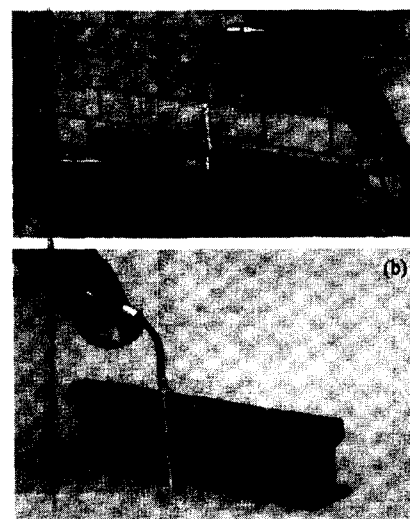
Rail track welding acc. to the Lincoln-Method - works (photograph : Lincoln-Smitweld, Erkrath/Germany)
